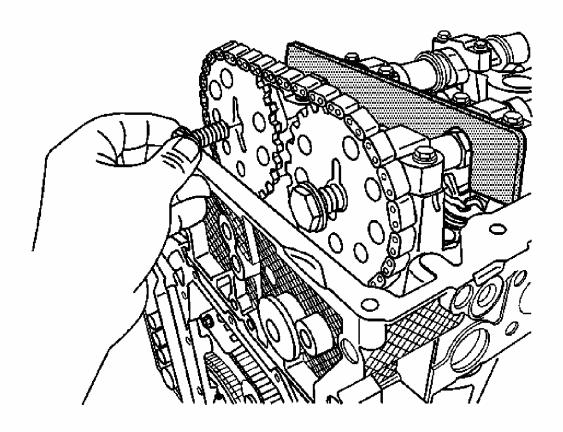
Identifying Left Intake Camshaft Sprocket Bolt Courtesy of GENERAL MOTORS CORP.
